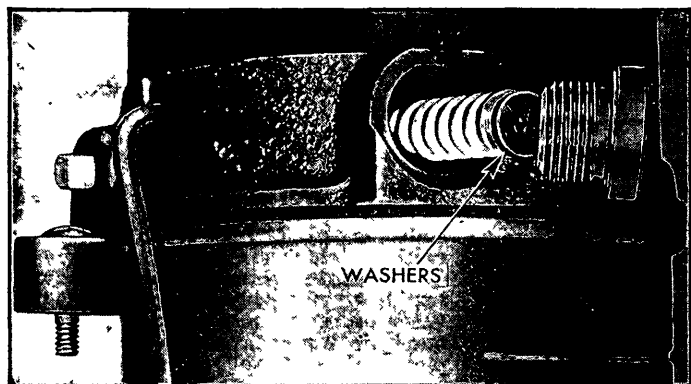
Removing pressure relief valve parts from Moraine pump. Washers shown are for regulating pressure
